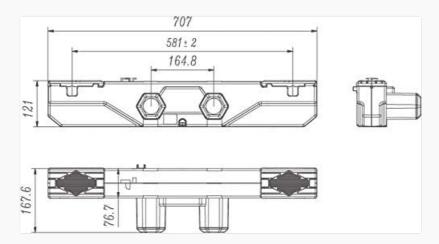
Detailed dimensions of the Richmat Electric Bed Motor (measurements in mm).
